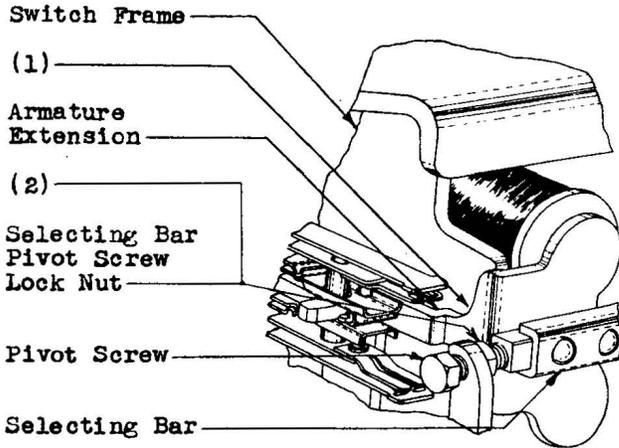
Fig. C - Clearance Between Selecting Armature Extension and Switch Frame
